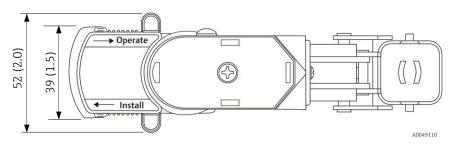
Rxn-46 probe top view. Dimensions: mm (in)
